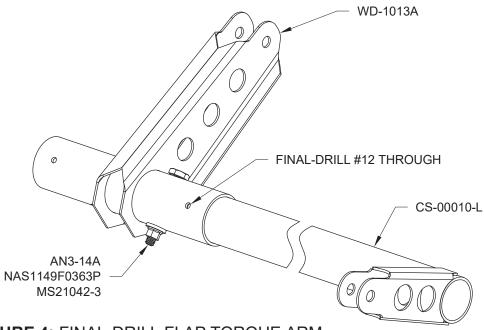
FINAL-DRILL FLAP TORQUE ARM
